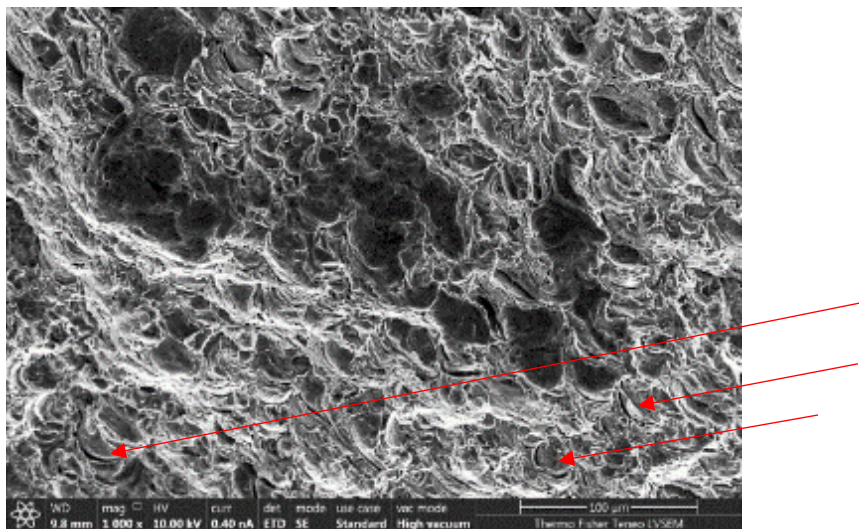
Fracture surface of RH-95% specimen. The fracture surface contains evidence of particle impact sites not completely bonded and ‘half-moon’ features denoted by the red arrows.
